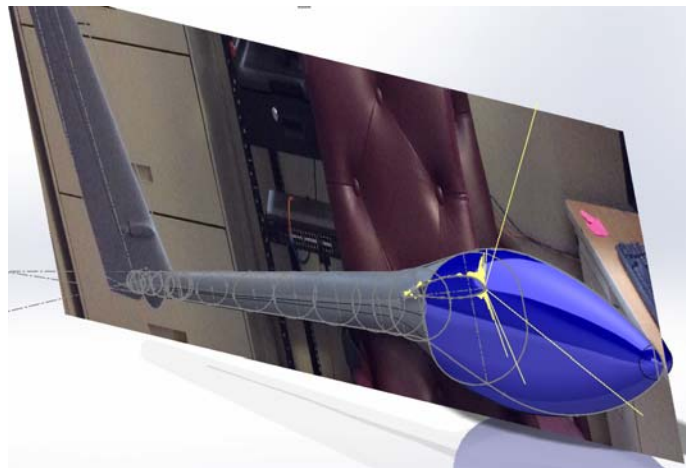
Picture Sketch Technique Applied to the SBXC Fuselage.
